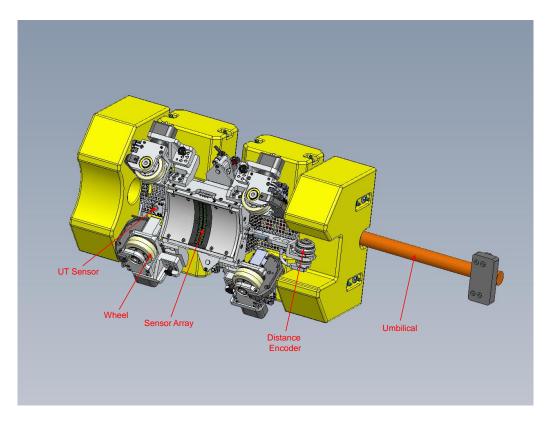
The MEC-Combi Crawler tool for the inspection of pipelines for top-side deployment (bottomside view).
